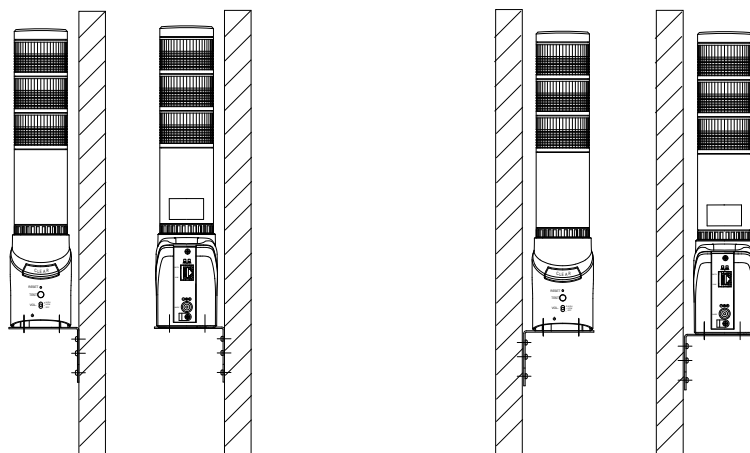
Wall Mount Surface Bracket Figure
